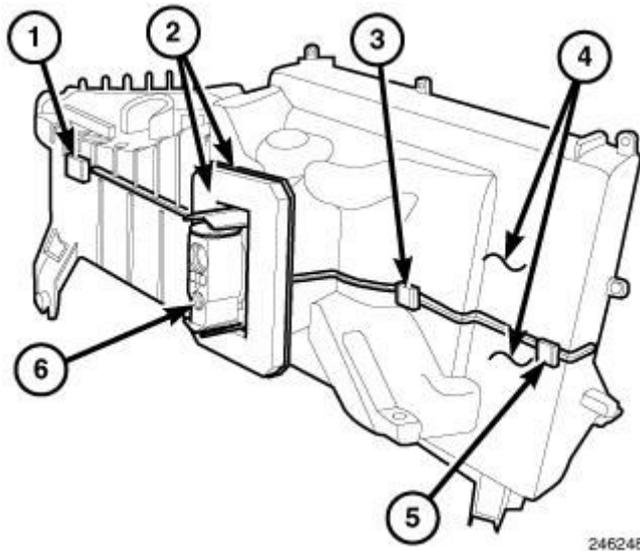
Foam Seal And Plastic Flange, HVAC Housing, A/C Expansion Valve, Six Screws & Three Metal Clips
